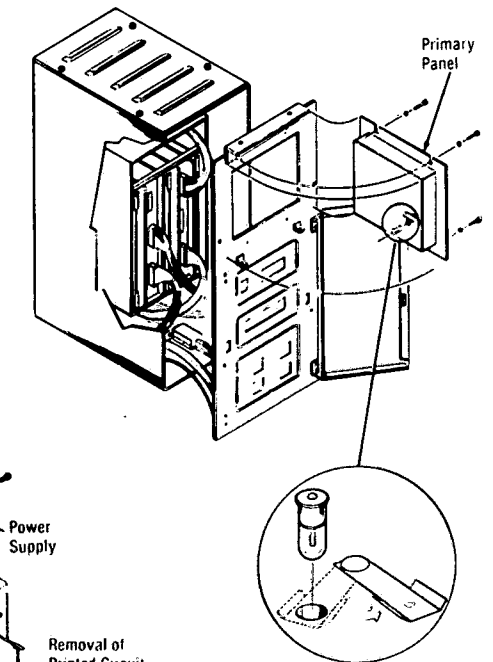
REMOVAL OF PRIMARY PANEL.
